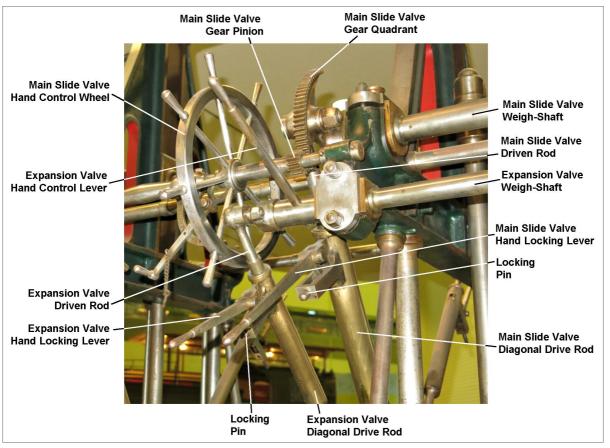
, Detail of the aft slide valve hand locking levers in the engaged position. The locking pins are in when the hand lever is at right angles to the diagonal drive rods. The valve weigh-shafts would be moving (rocking) when the engine is running. Pushing the locking levers 90 degrees towards vertical would pull the locking pins out and disengage the valve weigh-shafts. Figure 20 shows a locking lever in the disengaged position.
